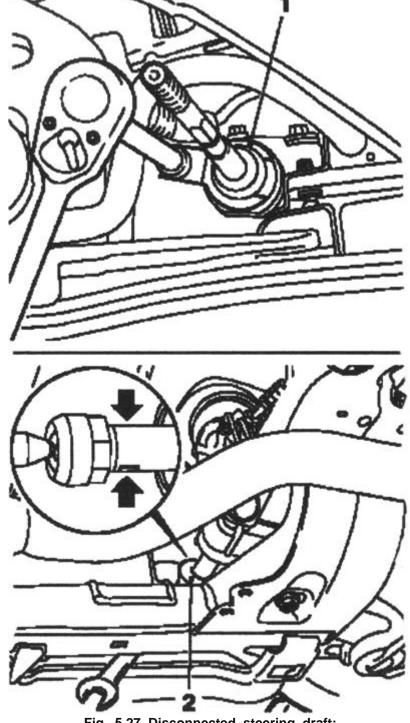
Disconnected steering draft: 1 - a special tool, 2 - Wrench
